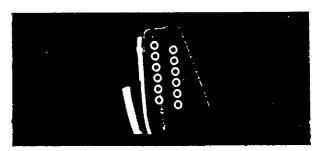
Enlarged Image of CT Scan Through Critical Weld Joint Area
